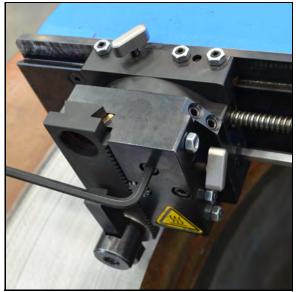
SWIVEL HEAD LOCKING SCREW ON THE FRONT OF THE TOOL POST
